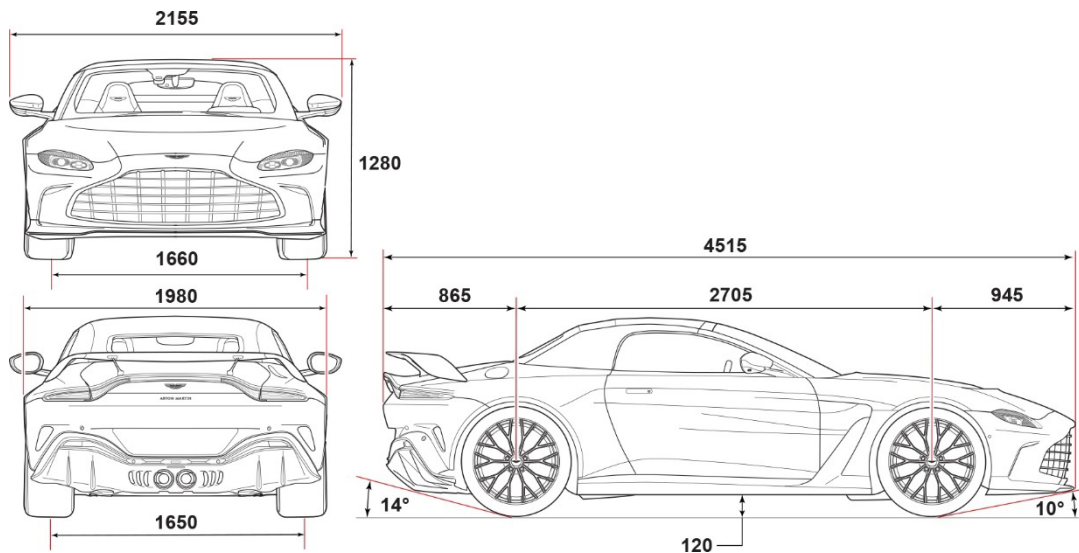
Roadster Exterior Dimensions (in millimetres)
